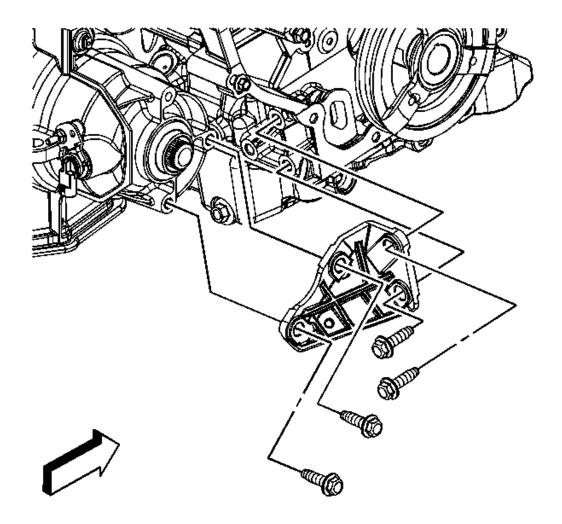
Transaxle To Engine Bolts/Stud Courtesy of GENERAL MOTORS CORP.
